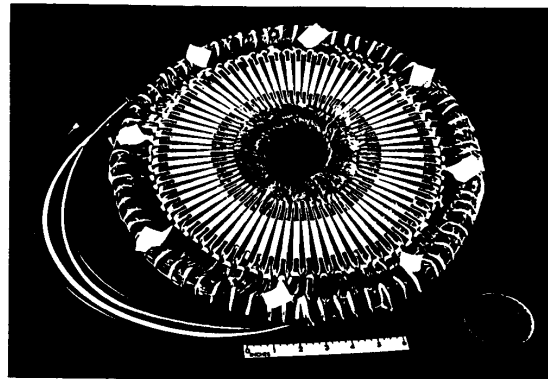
Stator assembly showing teeth and windings prior to encapsulation.
